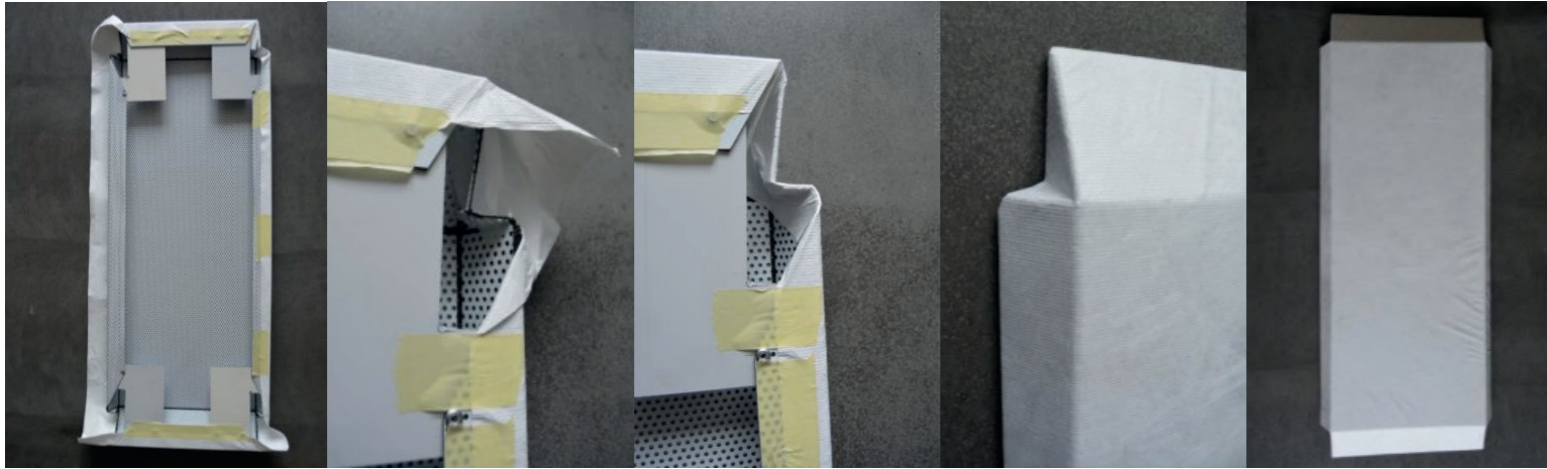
Covering the prototype with PE fleece, with details of the inward fold of the foil at the inner corner (bottom). The bonding surfaces/foil edges have been moved inwards.
